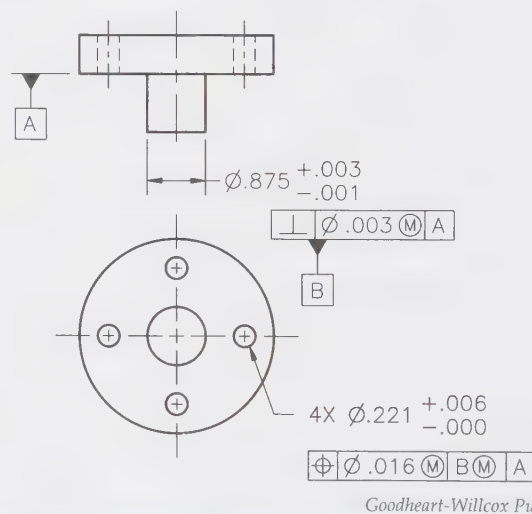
One datum feature of size and one datum surface may be used to establish a datum reference frame.
